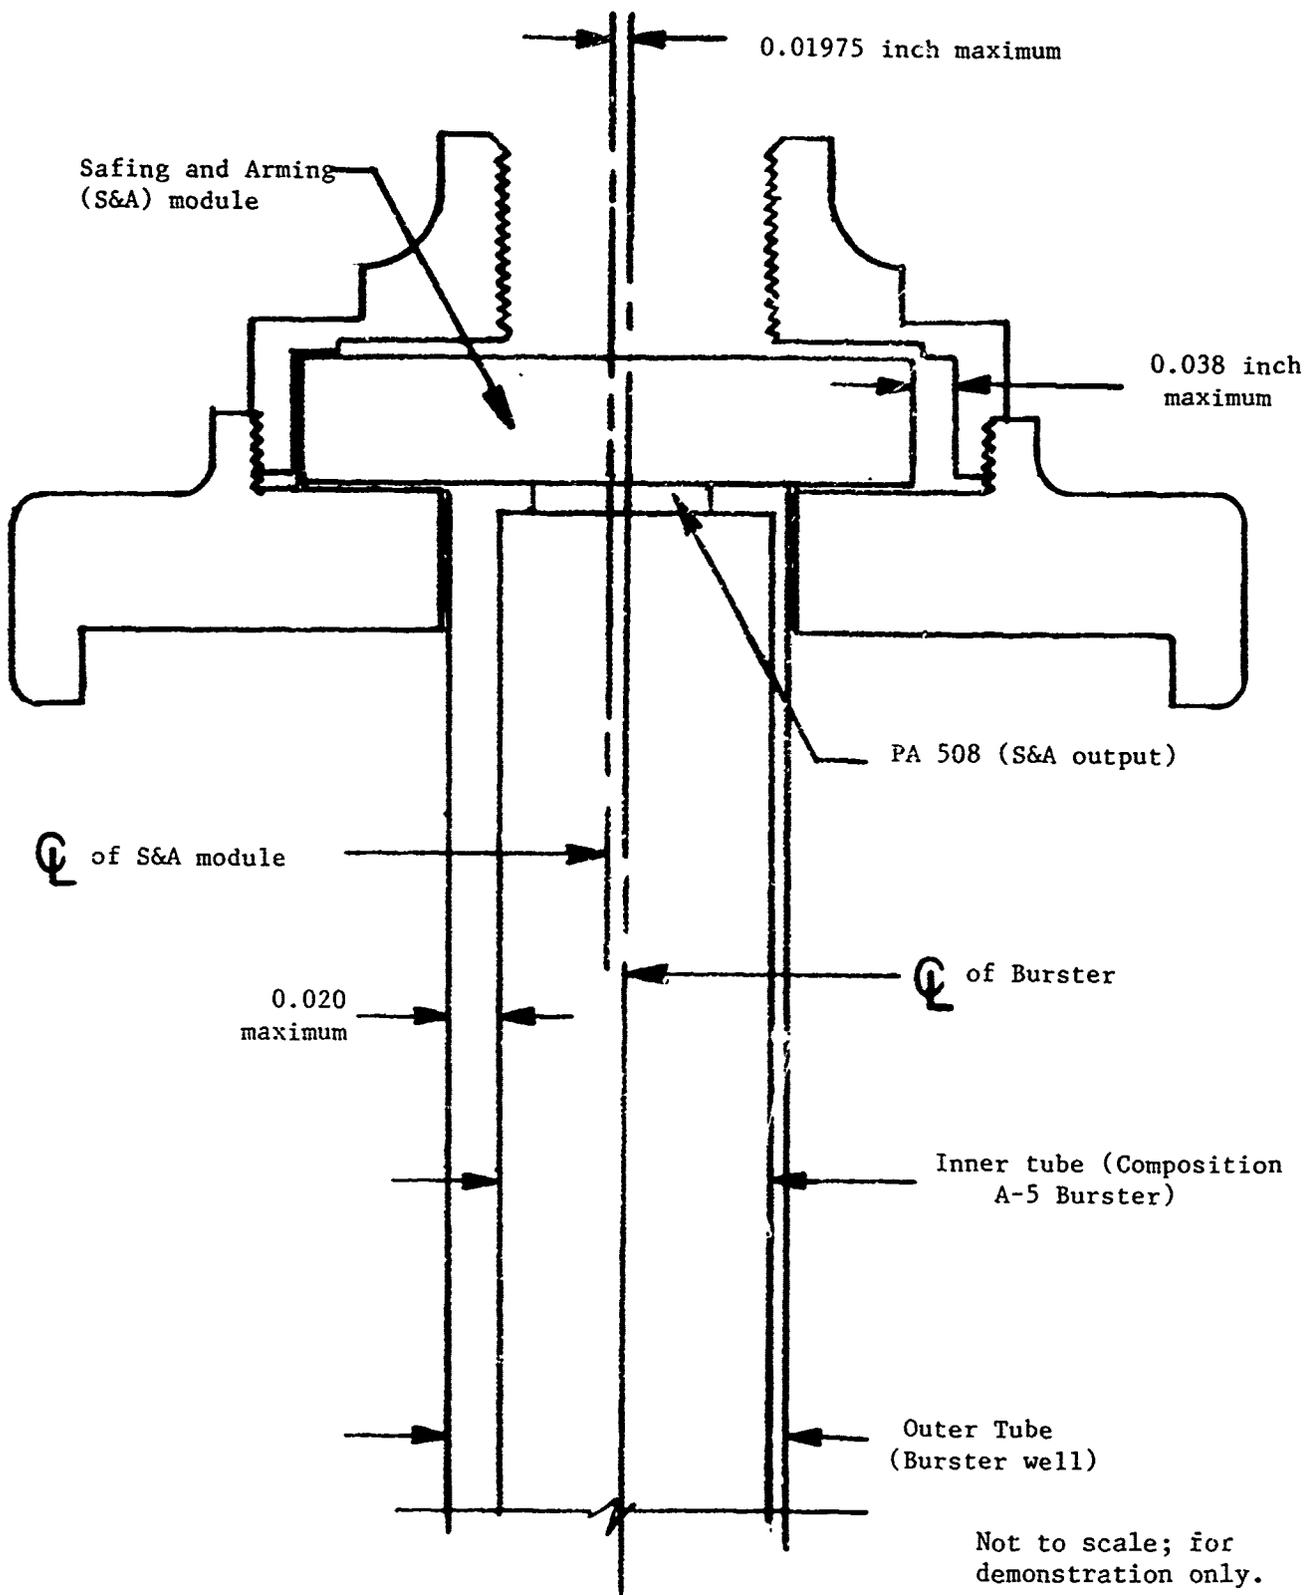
Horizontal tolerance M825/M825AI assembly
